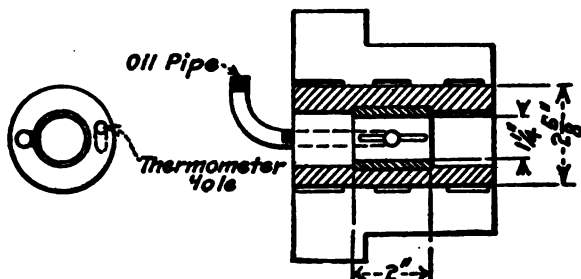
SEC. 6.—Bearing of testing machine shown in Fig. 39, Sec. 6.
